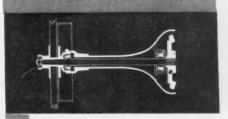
In a semi-floating axle the rear wheel is attached solely to the end of an axle shaft which projects beyond bearing at housing end
